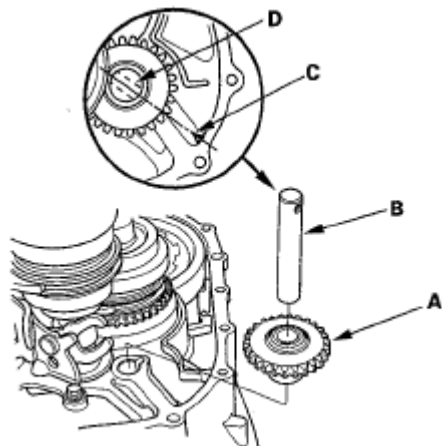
Aligning Mark Of Reverse Gear Shaft Hole
